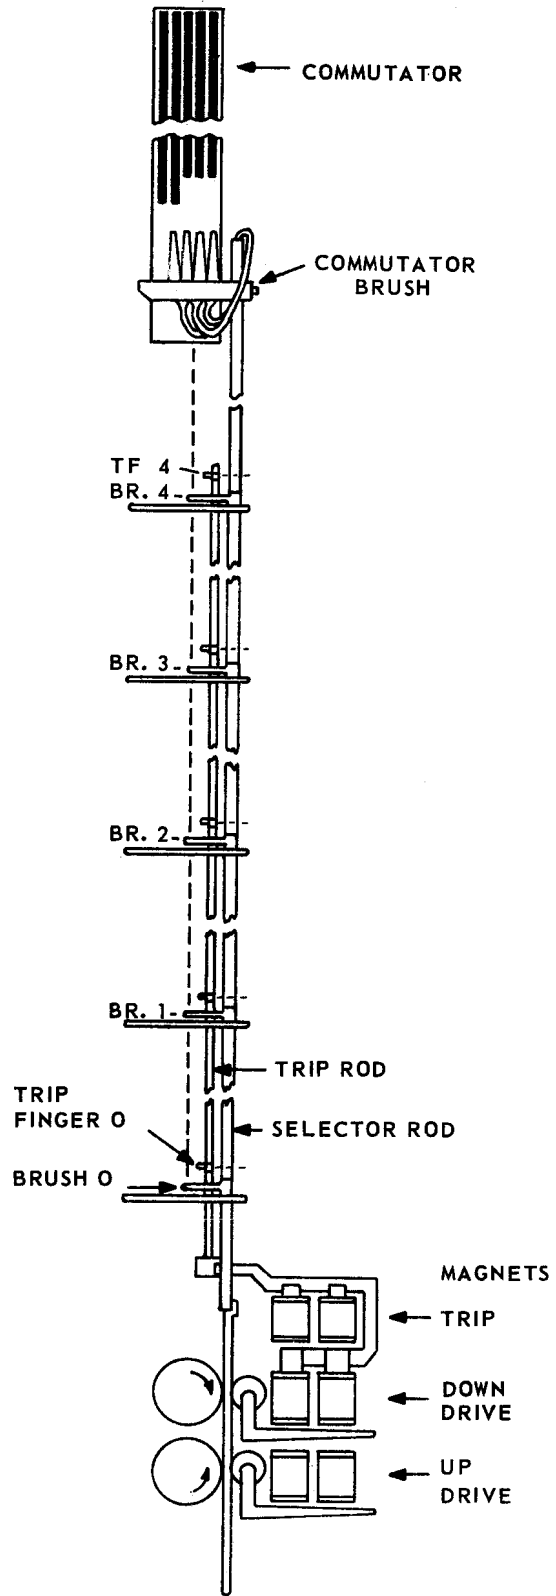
Selector Rod, Drive Mechanism, and Clutch Assembly
